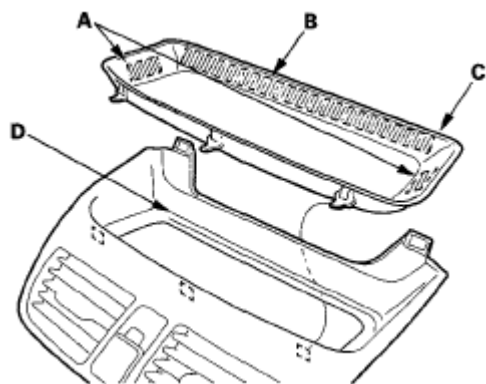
Identifying Adhesive Tapes, Tray Mat And Center Tray
